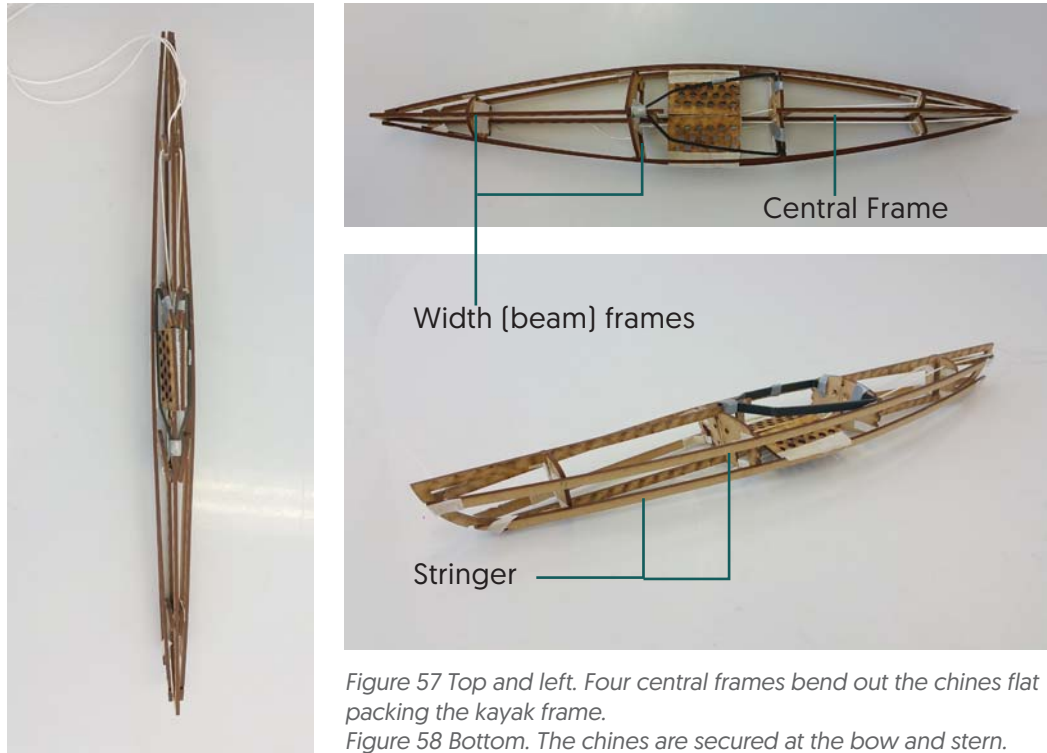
Top and left. Four central frames bend out the chines flat packing the kayak frame.
